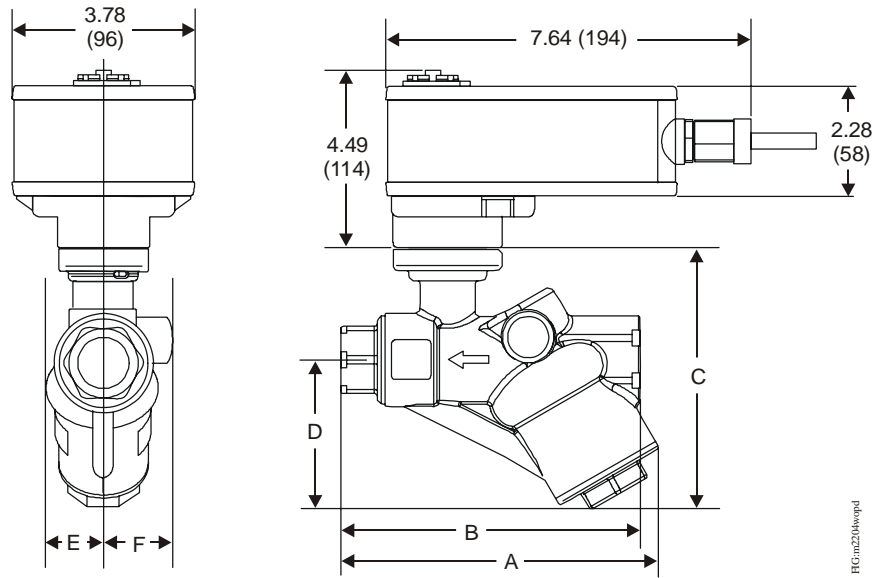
M2204 Actuated P1000 Valve without Pressure Taps Dimensions, in. (mm)
